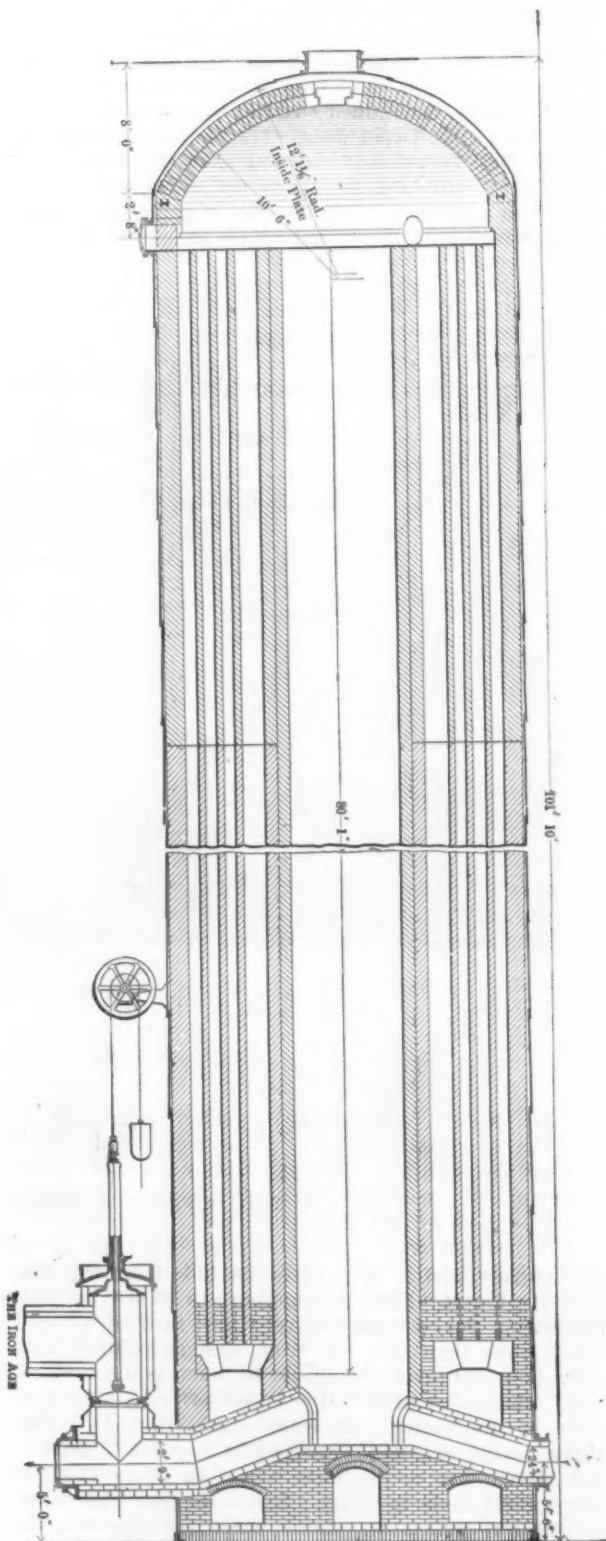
Section through Hot Blast Valve and Gas Burner.
